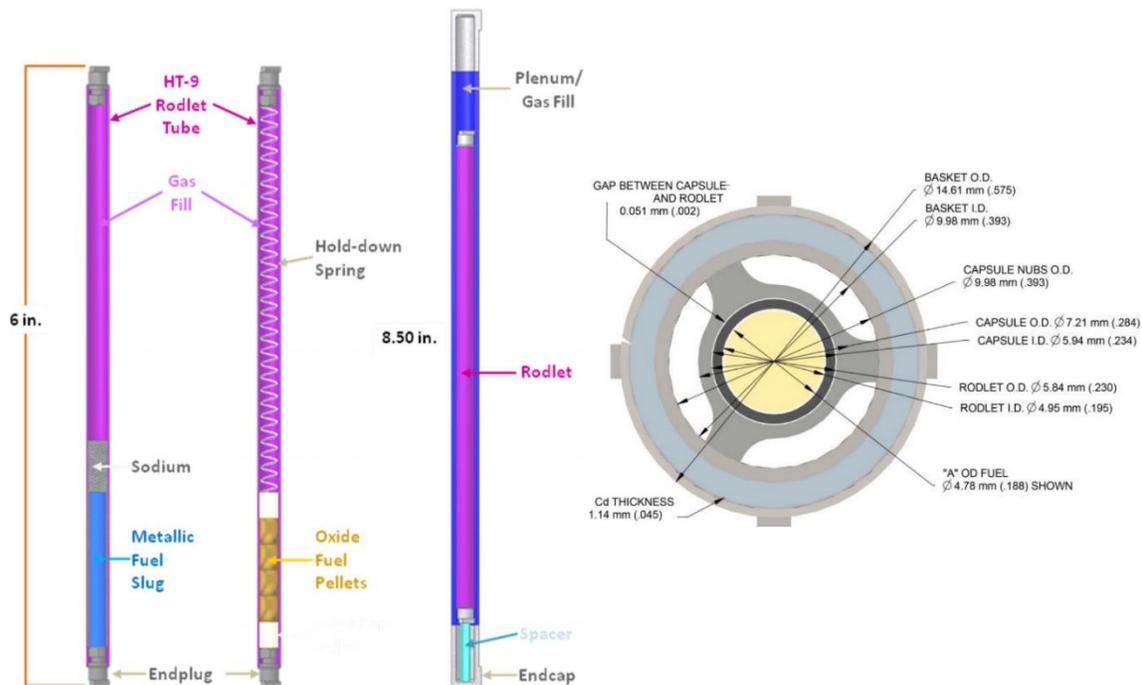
AFC-4 rodlet assembly and inner test train assembly (left); Cross-section of AFC-4 capsule contained in cadmium-lined experiment basket (right)²⁵
